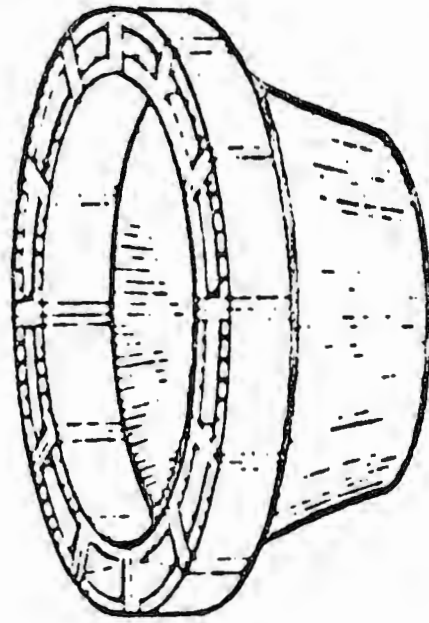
Phase I Main Engine Thrust Chamber Assembly (U)
